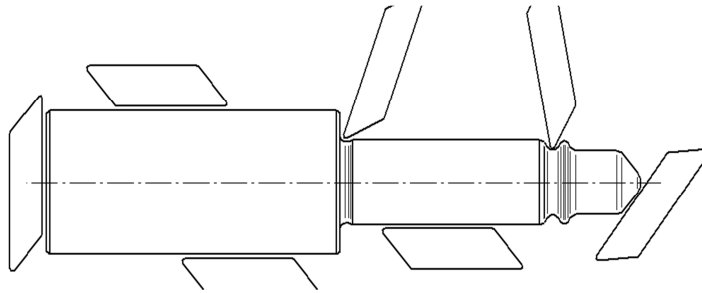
Selection of proper media shape for mass finishing basing on the workpiece geometry
